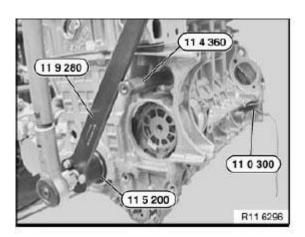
Removing Chain Tensioner Courtesy of BMW OF NORTH AMERICA, INC.
